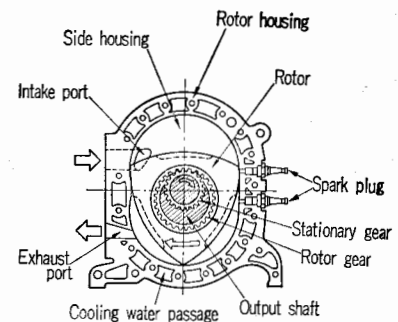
Basic construction of NSU-Wankel type rotary engine
